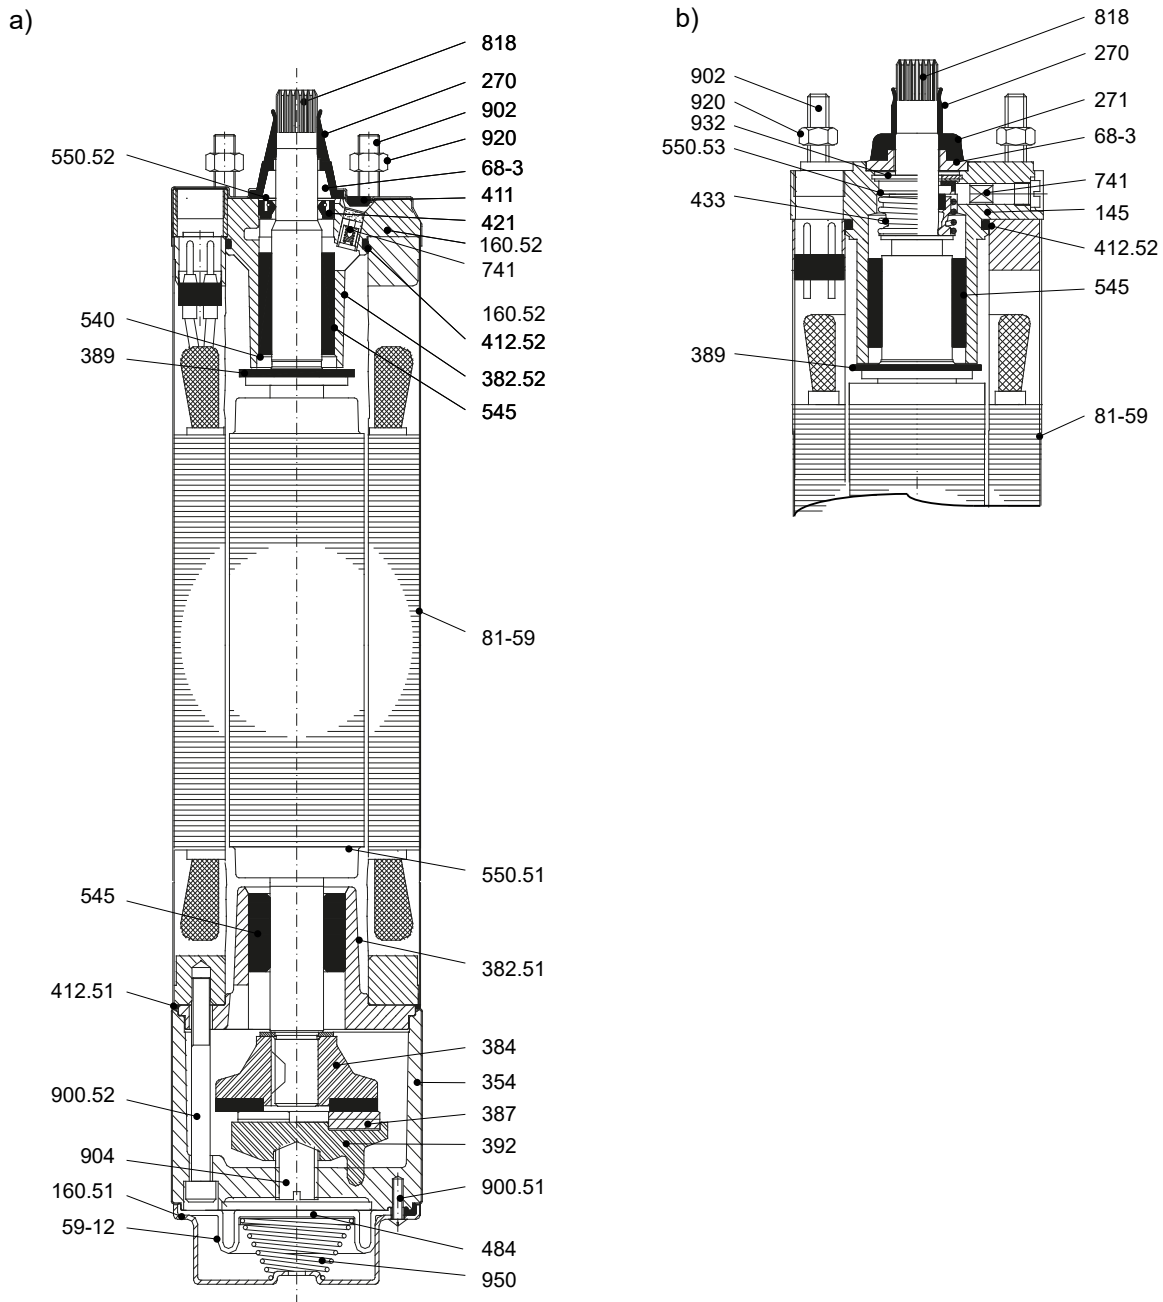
General assembly drawing of motor DN 100, from 3 kW, a) Material variant E, b) Material variant C
